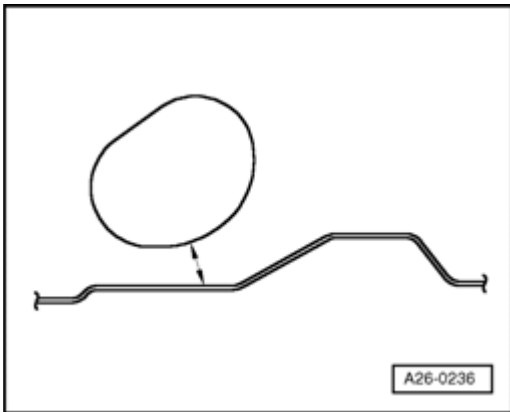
Identifying Gap Between Exhaust Pipe And Heat Shield For Steering Box
